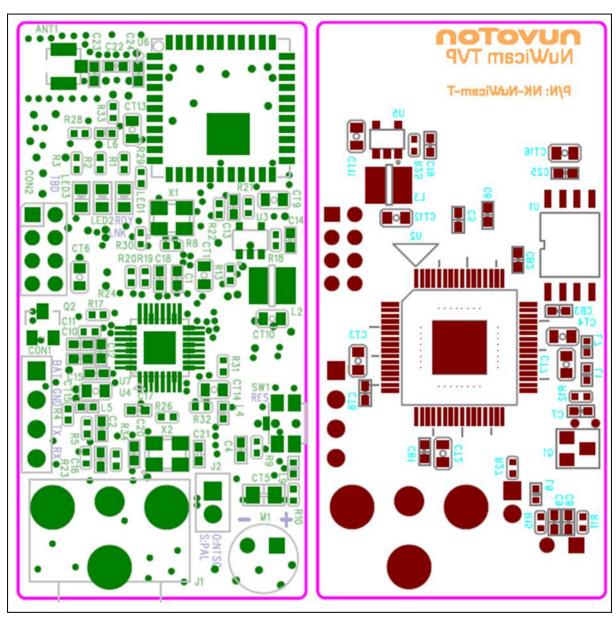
Front and Back NuWicam-TVP PCB Placement
